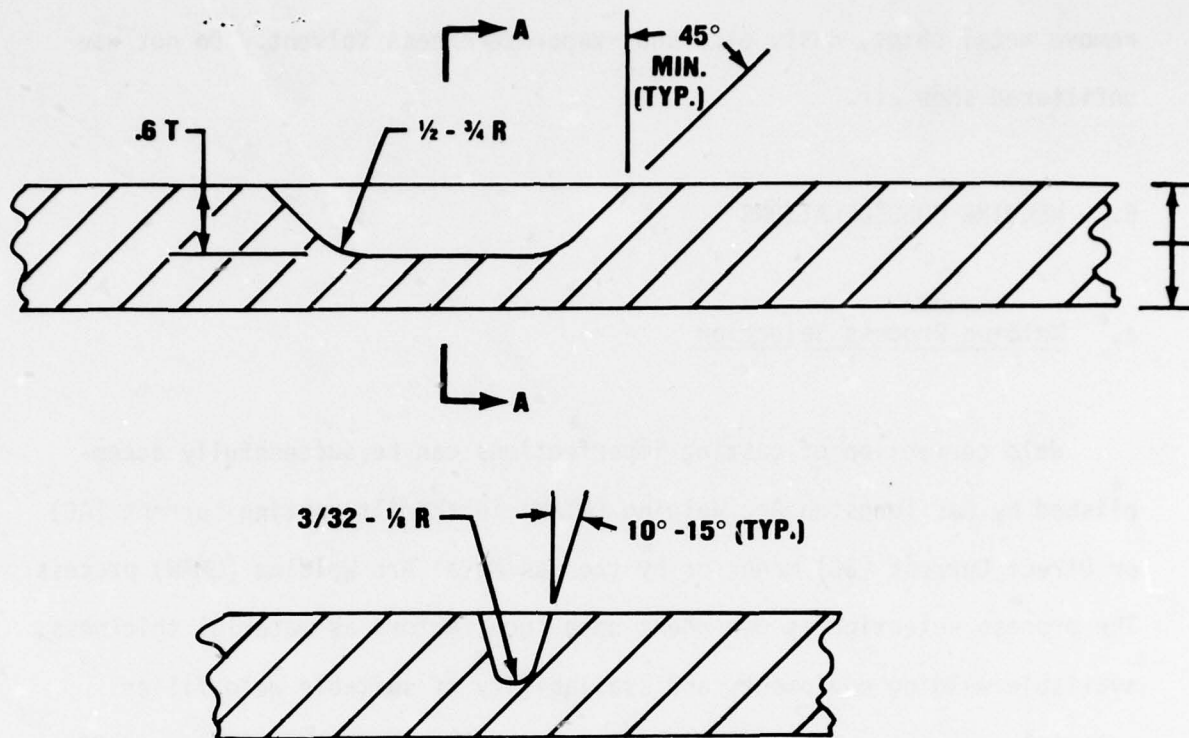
TYPICAL GROOVE CONFIGURATION FOR WELD CORRECTION
